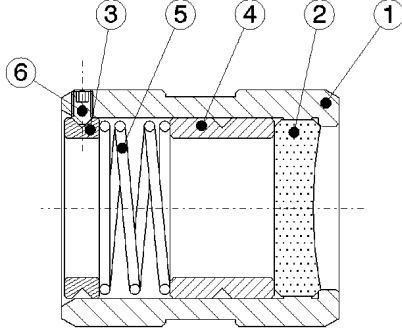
Technical drawing of the cavity mirror mount system. From [129].
